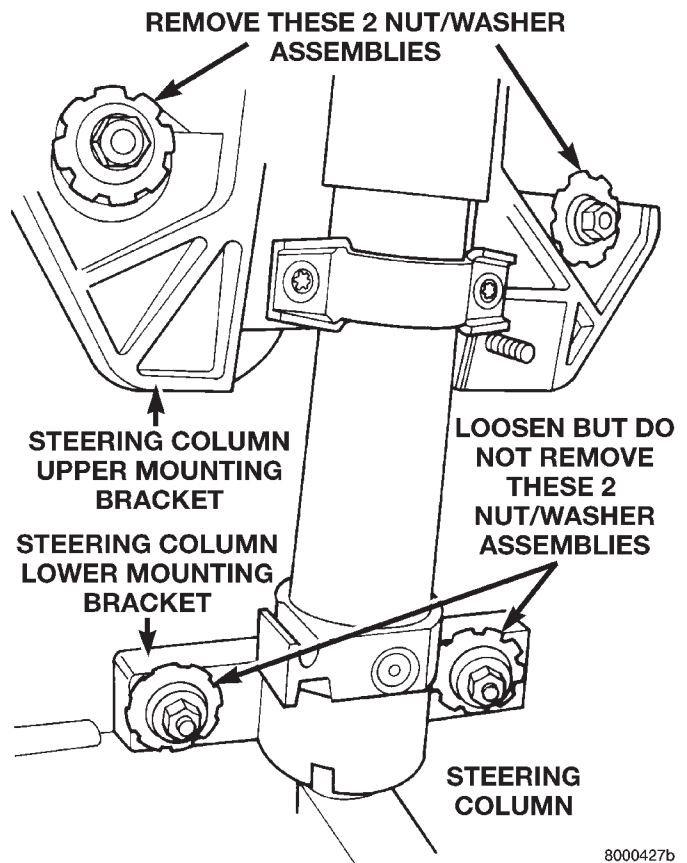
Steering Column Upper And Lower Mounting Brackets
